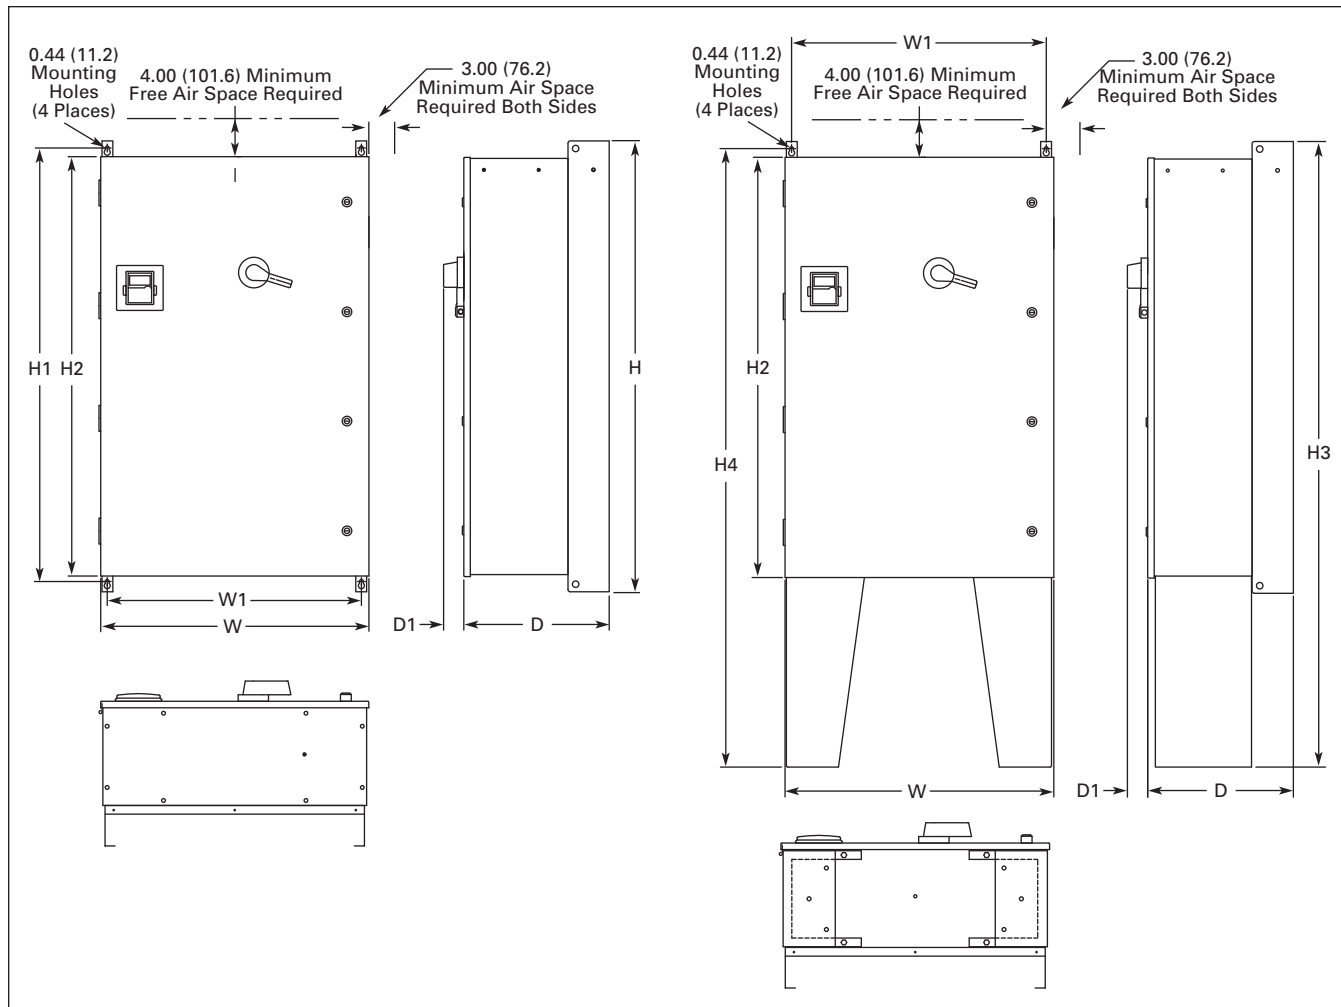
Enclosure Box B — UL Type 12 Dimensions
